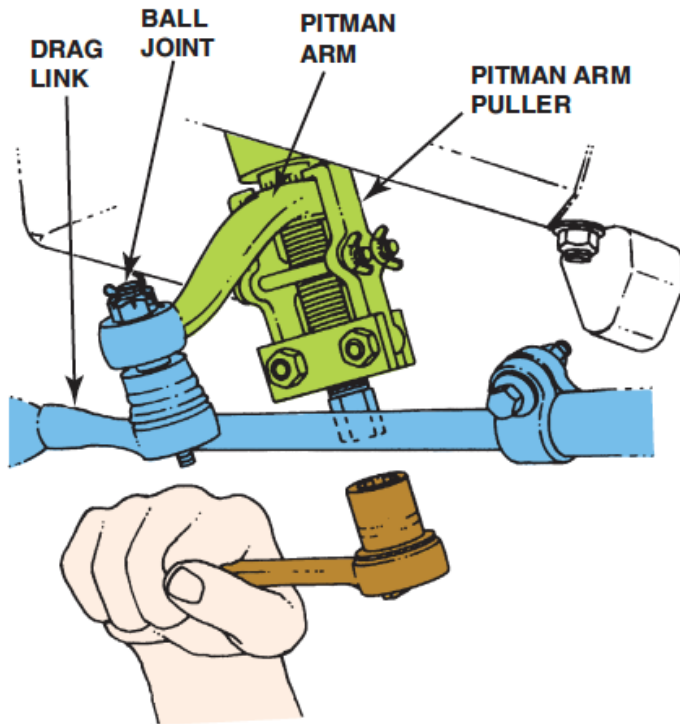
Removing the pitman arm from the steering gear sector shaft.
